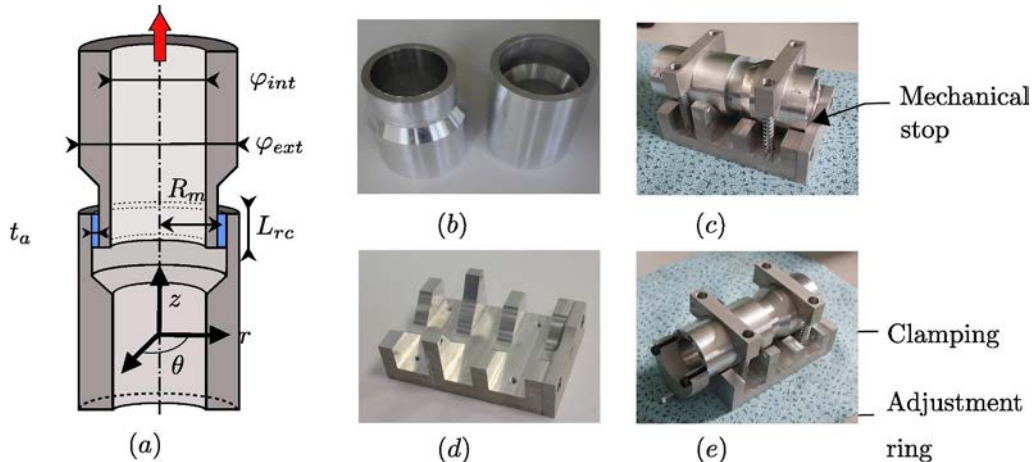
Tubular sample (a) schematic view cut and dimensions (b) aluminum substrates (c) adhesive bonding set-up (d) and (e) clamping and adhesive length control.
